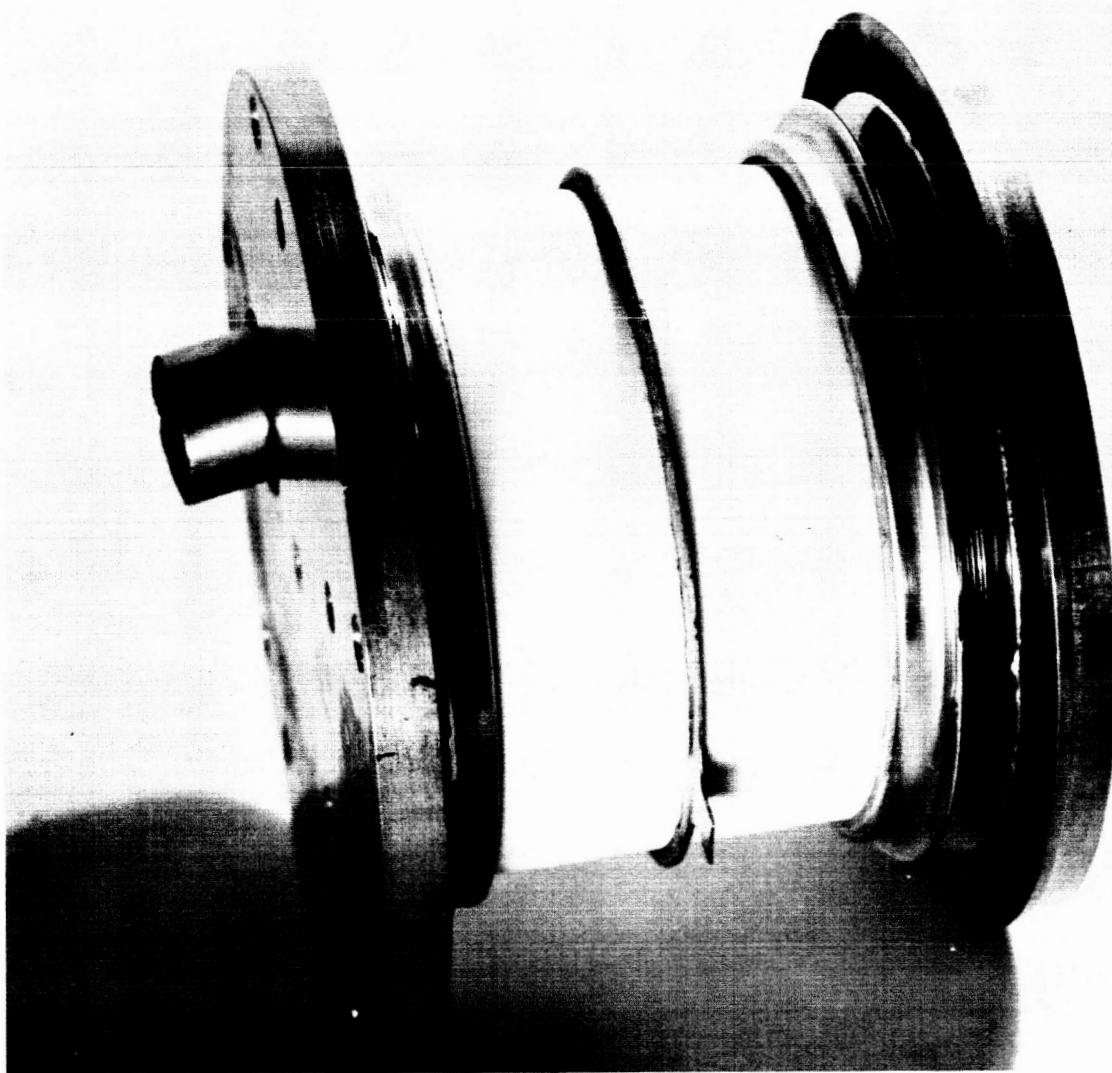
Vacuum Capsule Assembly Prior to Attachment of Ion Pump.
